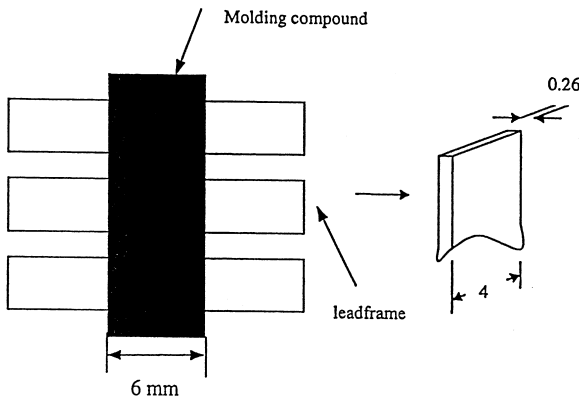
Schematic drawing of leadframe pull-out specimen.
